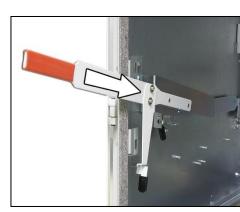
Pushing the slip-on lever into the guide groove to end position
